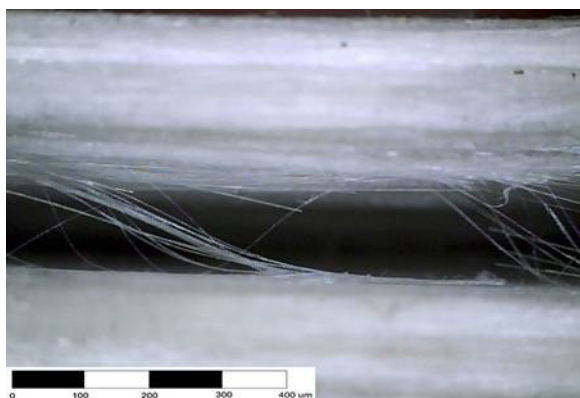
Connection position after failure in the sample with welding time of 1.2s
